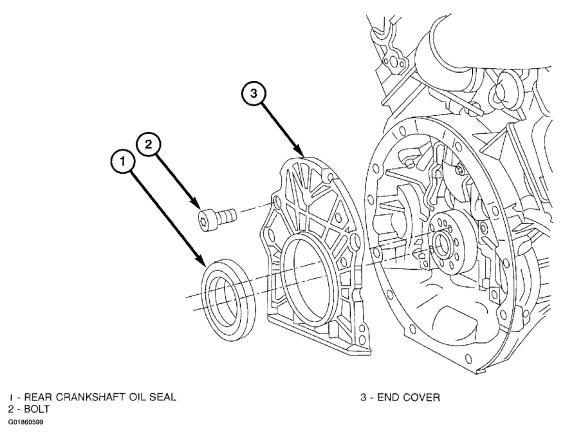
Removing Crankshaft Oil Seal Courtesy of DAIMLERCHRYSLER CORP.
